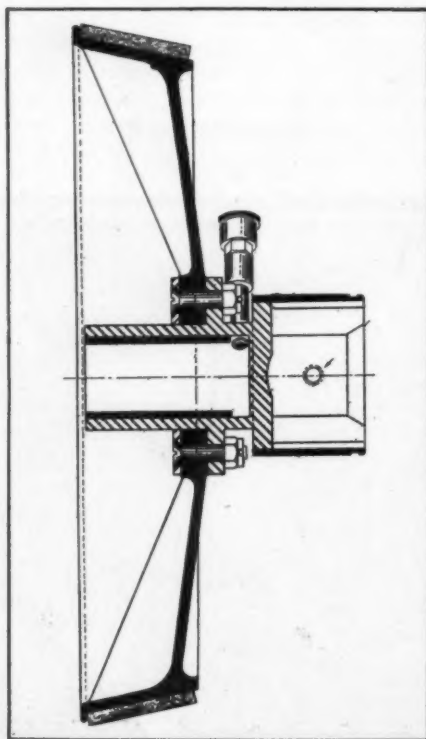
Section of the cone clutch, showing the method of fastening the same to the clutch housing and the leather facing
